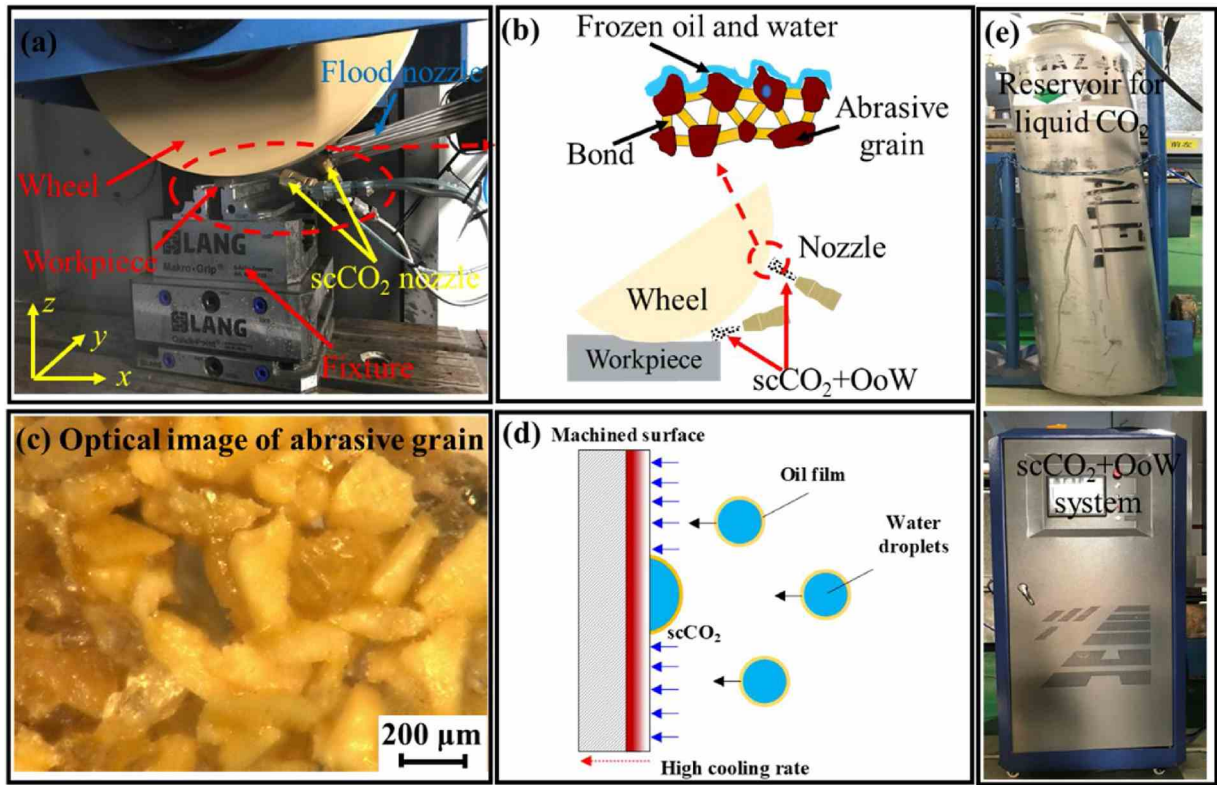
(a) Experimental setup, (b) wheel-workpiece contact zone, (c) abrasive grain, (d) oil on water mechanism and (e) cooling system in the present work.
